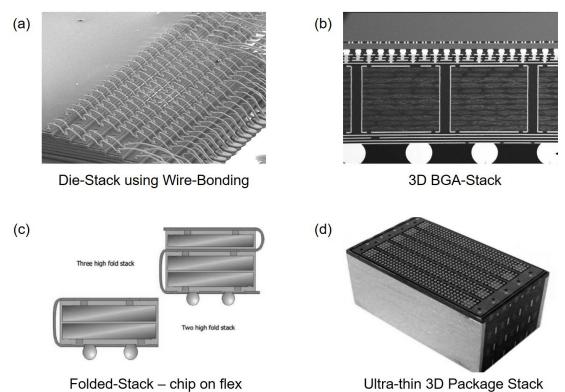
Illustration of different 3D-packaging technologies: (a) wire-bonded die-stack, (b) BGA-stack, (c) folded–stack using chip-on-flex, and (d) ultra-thin package stack.[23]
